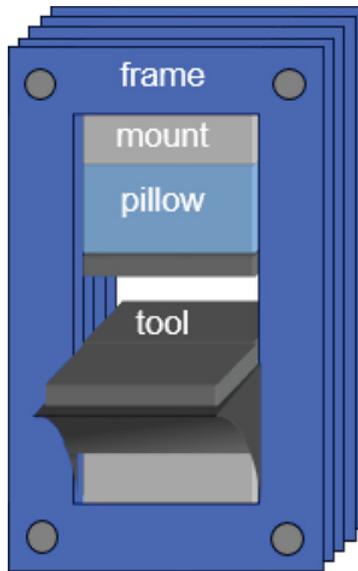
Basic construction of the FormBalancer® Hydroforming Machine.
